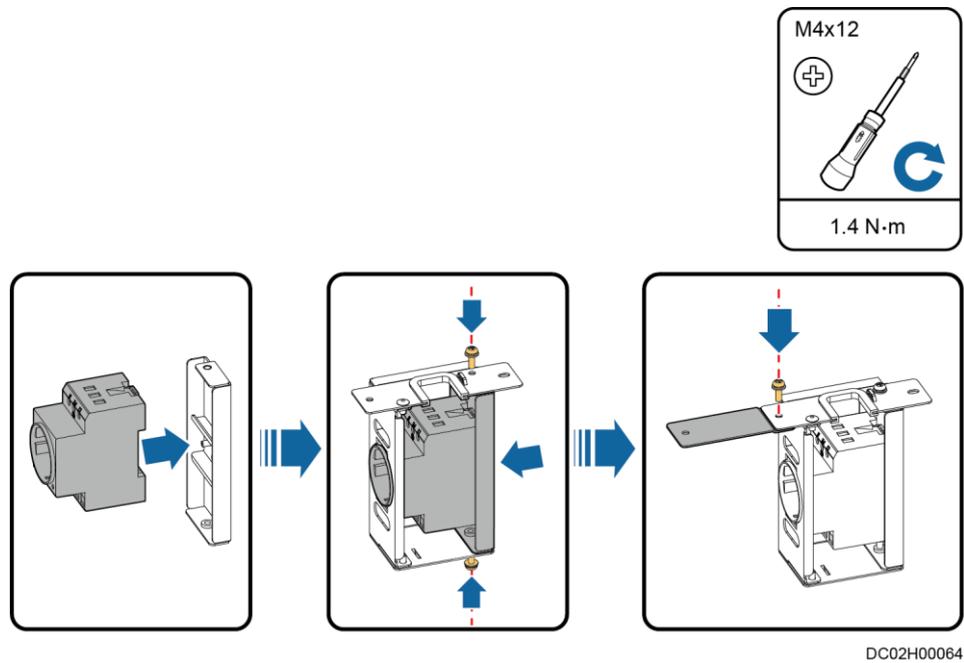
Assembling the pad power connector holder (BOM number: 14190242)
